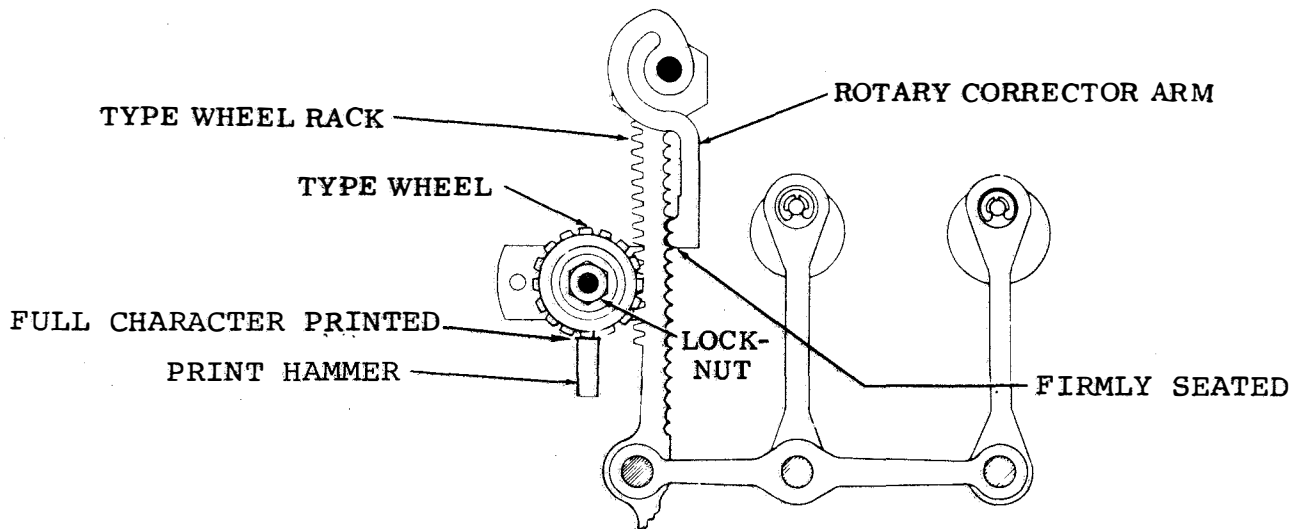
Type Wheel (Preliminary and Final) (For Chadless Tape), Front View
